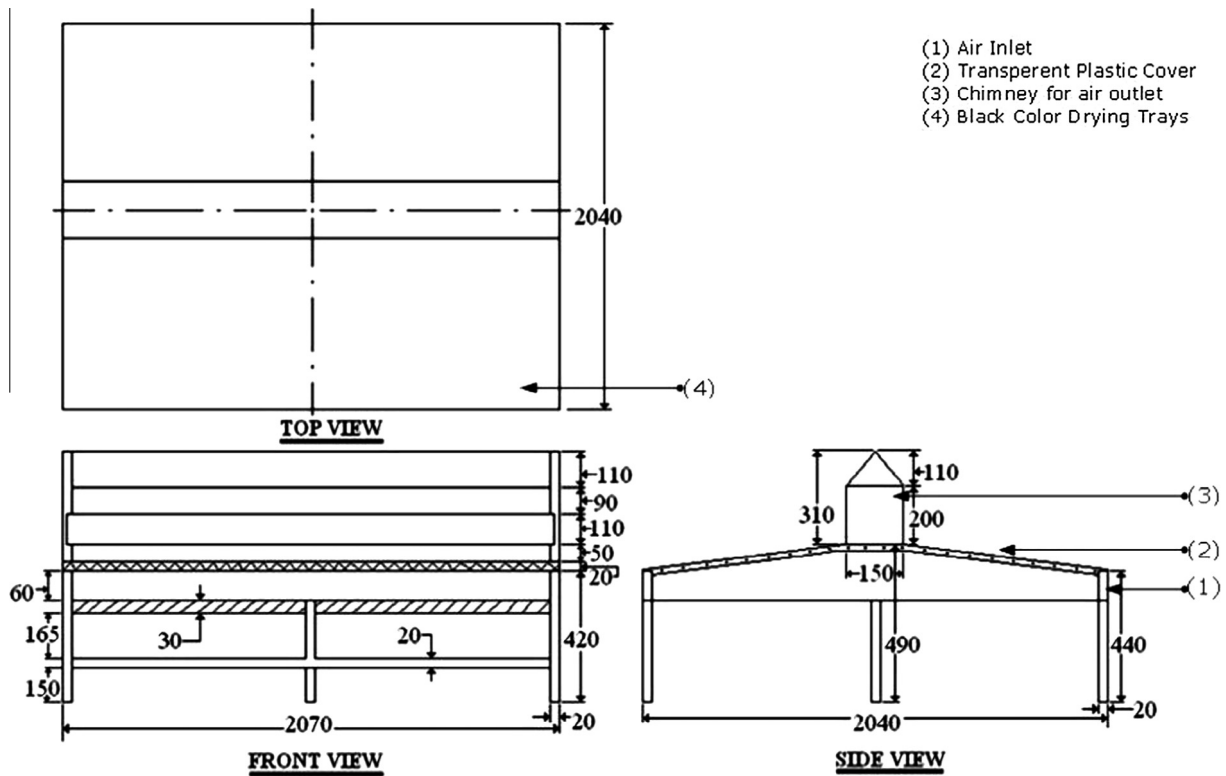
Engineering drawing of SCD (all dim. in mm).
